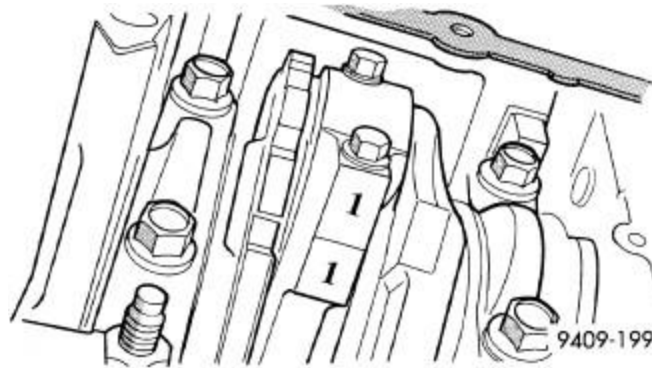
Identifying Mark On Connecting Rod And Bearing Cap
